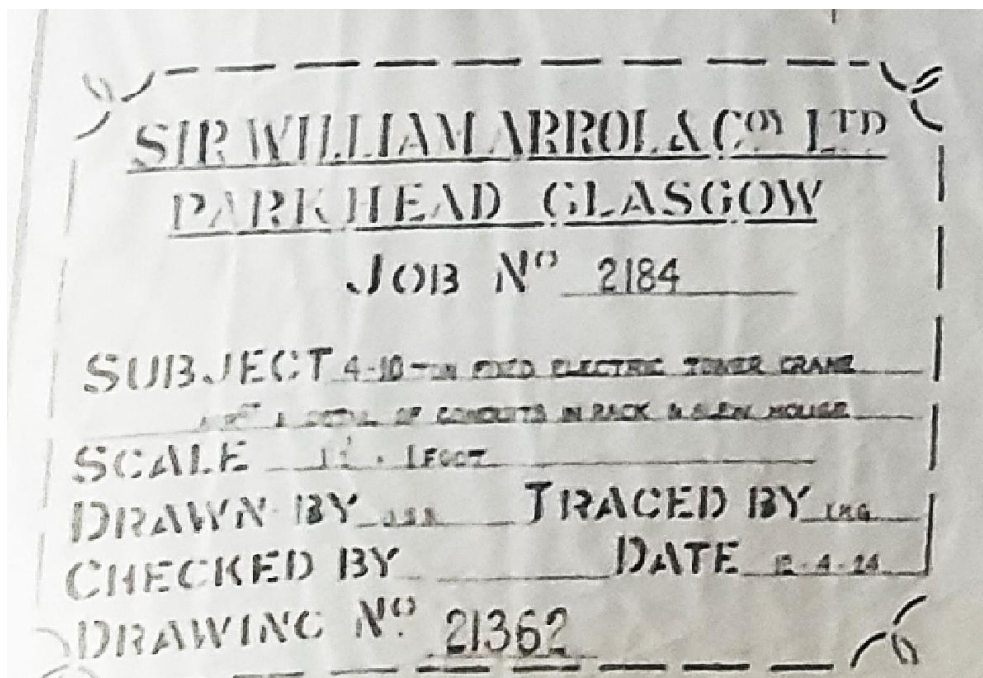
Title Block from an April 1924 Arrol & Co detailed engineering drawing describing the crane as a 4-10 Tons Fixed Electric Tower Crane. (NPWS collection)
